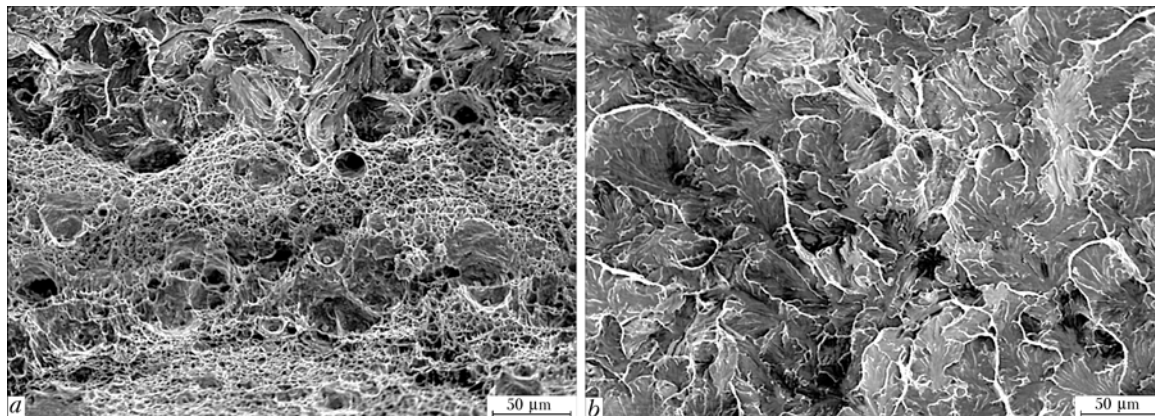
Fractograms of fracture surfaces in propagation of crack in JZ (a) and TMAZ (b)
